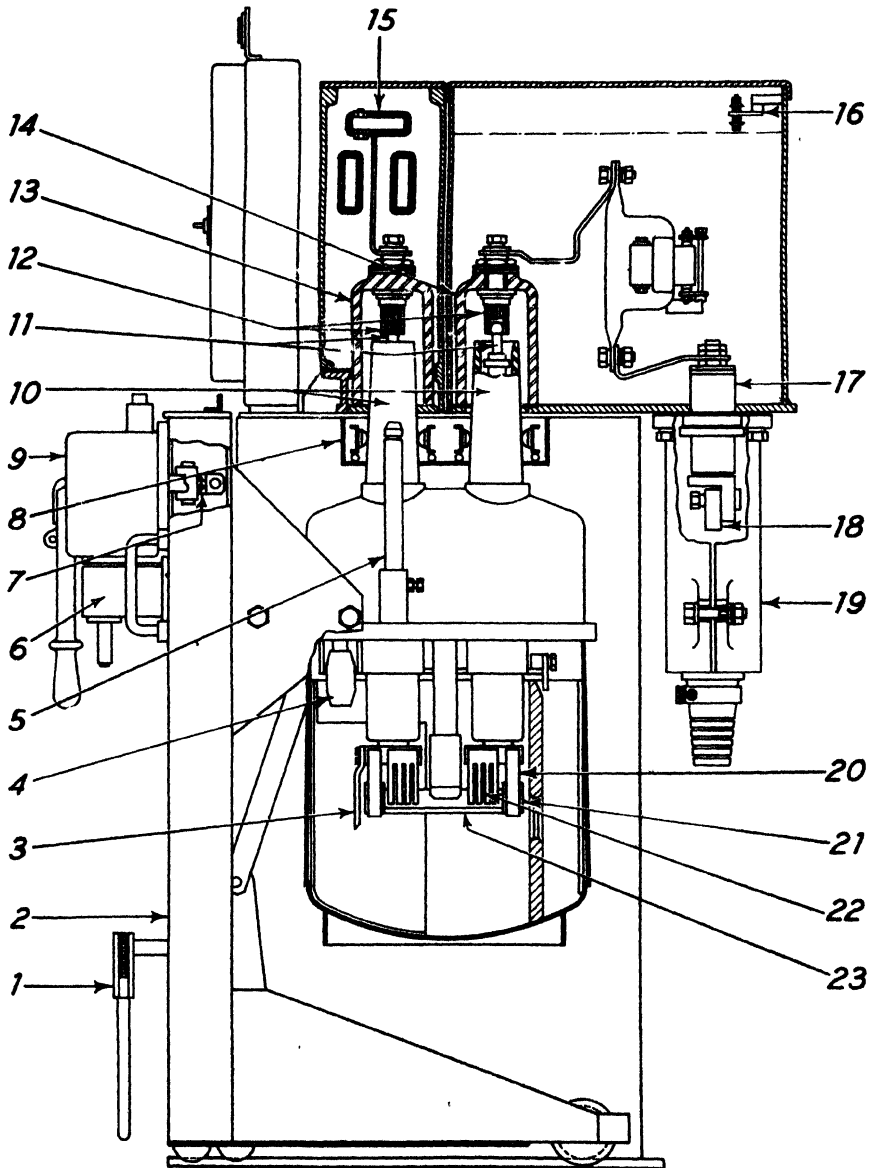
SECTION THROUGH A TYPICAL H.V. DISTRIBUTION EQUIPMENT SHOWING DETAILS OF PARTS
